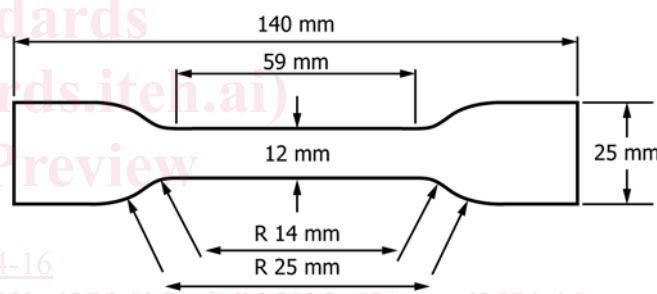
Die for Stamping Tensile Dumbbell Specimens—D412A Die
